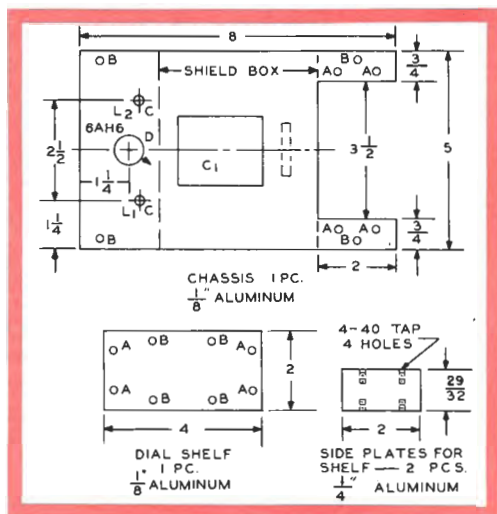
DRILLING DIAGRAM for the chassis plate, and dial shelf plates. Holes marked "A" were made with No. 32 drill; "B" with No. 27 drill; "C" with 9/32-inch diameter drill; and "D" with a 5/8-inch diameter socket punch.
